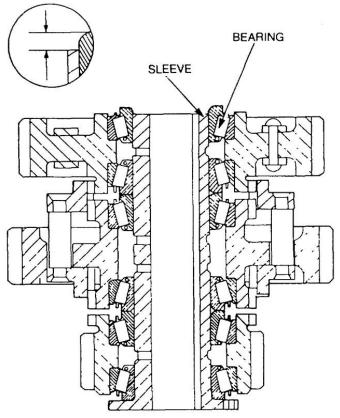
Intermediate Gear Assembly Pre-load Setting - Sectional View
